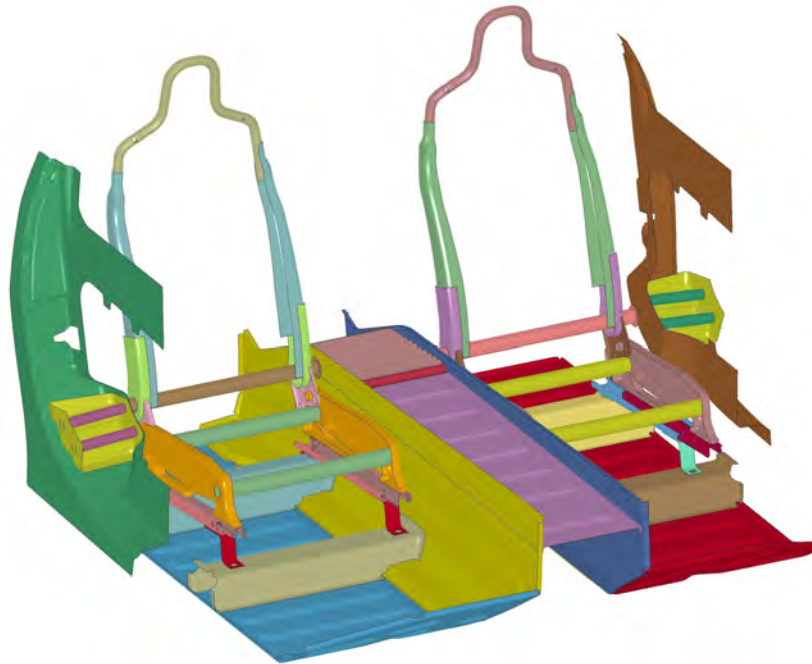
IIHS side impact - Components for transferring the load - at initial position
